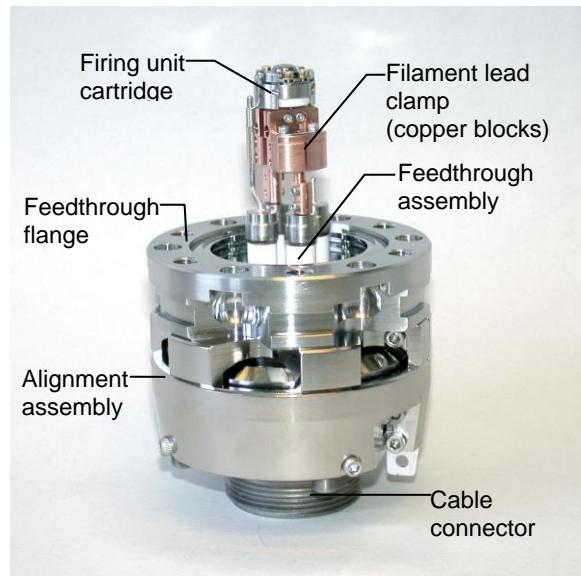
EGG-3101 Firing Unit Feedthrough Assembly removed from gun
